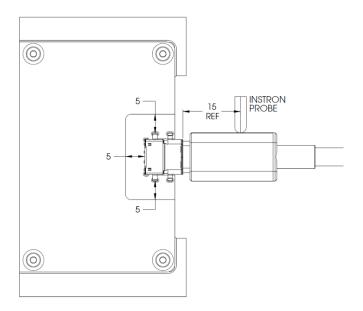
Example of 4-AxIs Continuity Test Fixture
